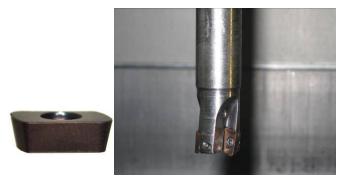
Cutting Tool : Carbide PVD Coated Cutter
